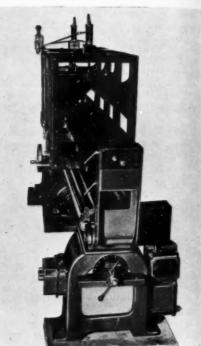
Circumferential welding machine showing elevated faceplate and adjustable torch support, accommodating a range of diameters and weld positions. The machine is set up for inside-out welding.
